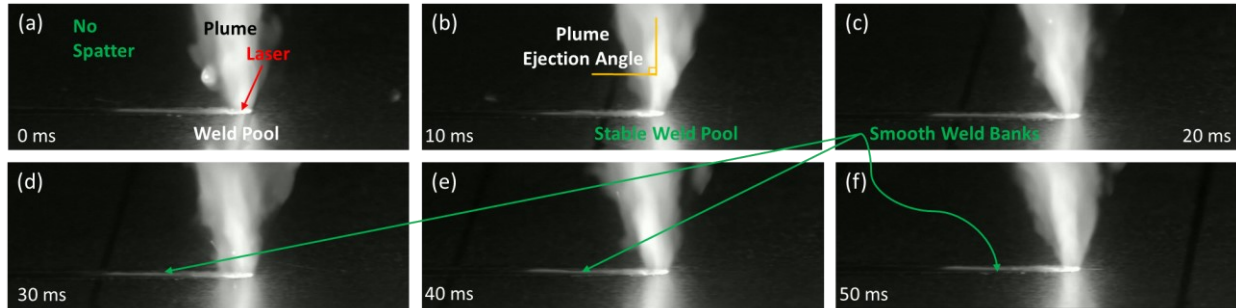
Still images of the welding process using the LBC showing a very stable weld pool with almost no visible perturbations in the molten weld seam.
